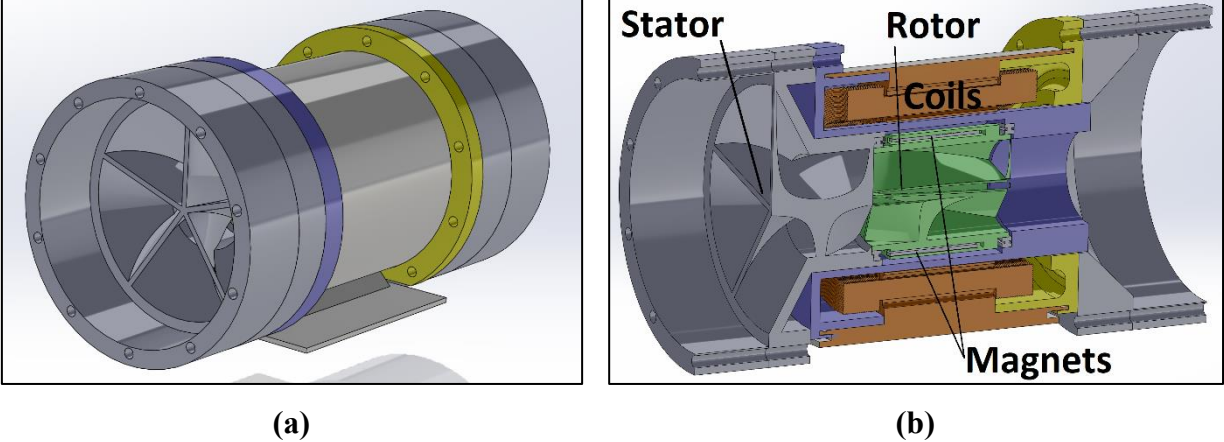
The proposed RDT design. (a) Perspective view (b) Cross-sectional view
